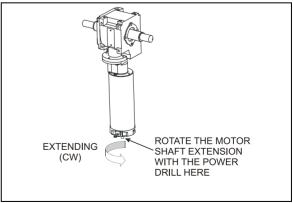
SLIDE-OUT MOTOR ROTATION
